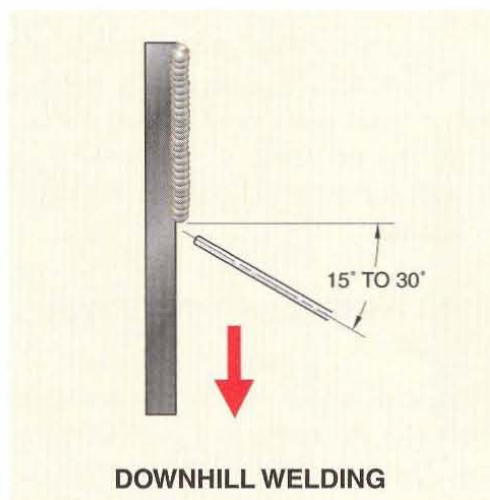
Maintain a travel angle of 15° to 30° for downhill welding.
